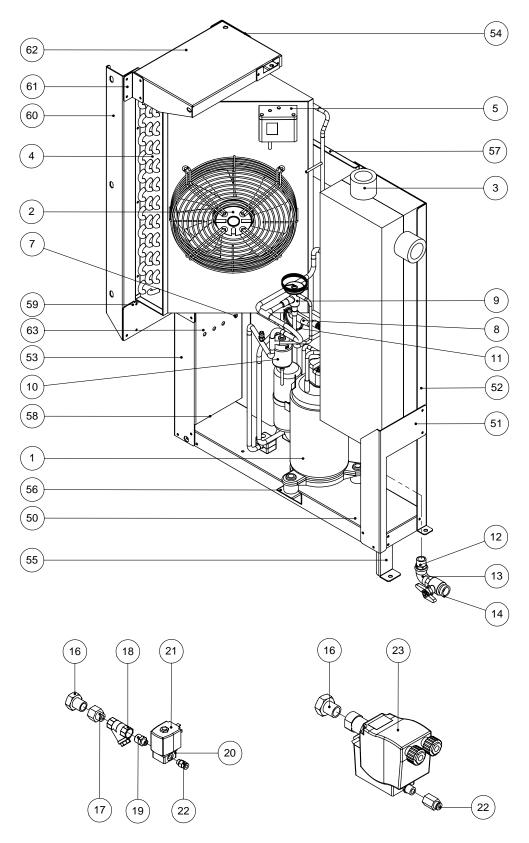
EXPLODED VIEW VS20 DRYER MODULE
